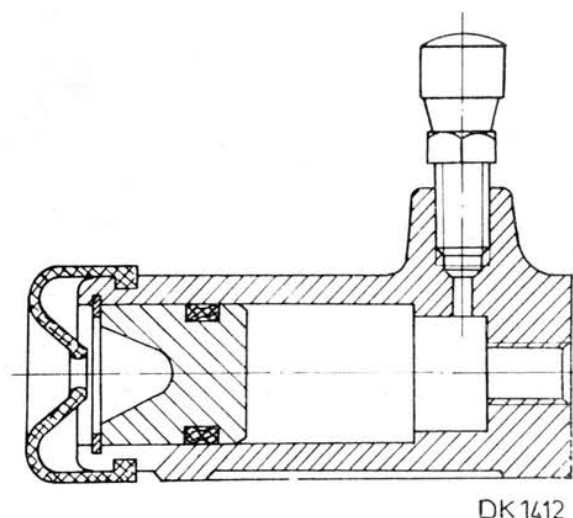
/1 - Clutch Slave Cylinder - Sectional View
